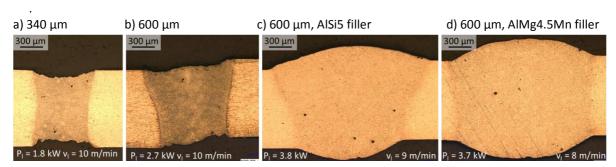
Cross sections of welded AA 7075 a) 340 μ m spot diameter, b) 600 μ m spot diameter, c) 600 μ m spot diameter and AlSi5 filler and d) 600 μ m spot diameter and AlMg4.5Mn filler
